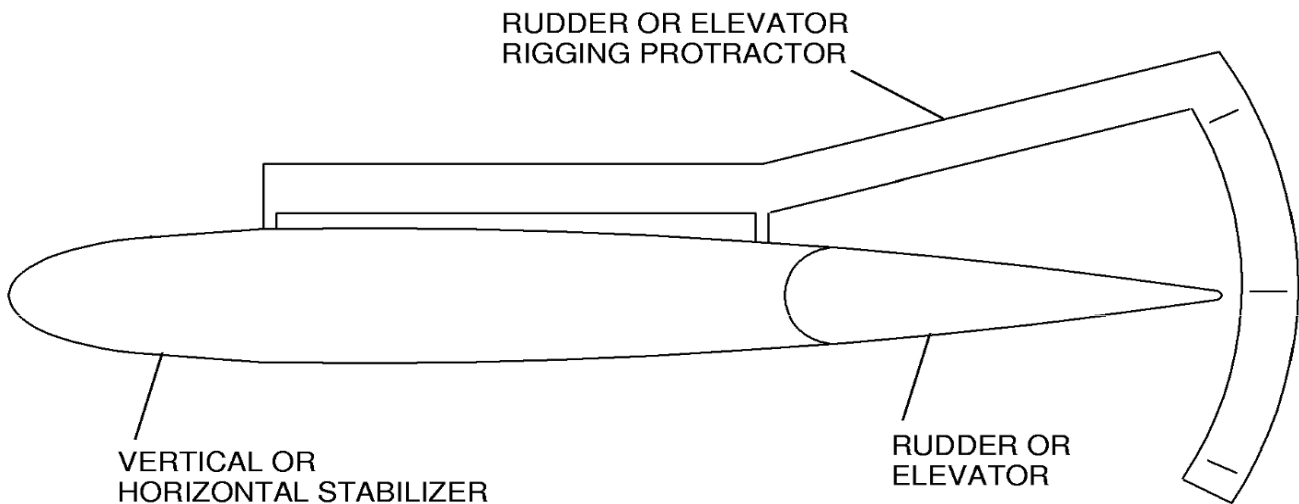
Sheet 3 : Rigging Tools Fabrication
